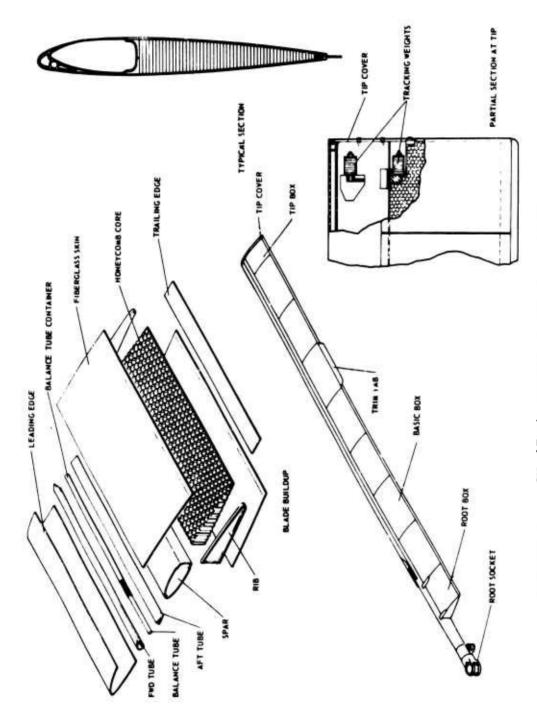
CH-47B/C ROTOR BLADE ASSEMBLY.
